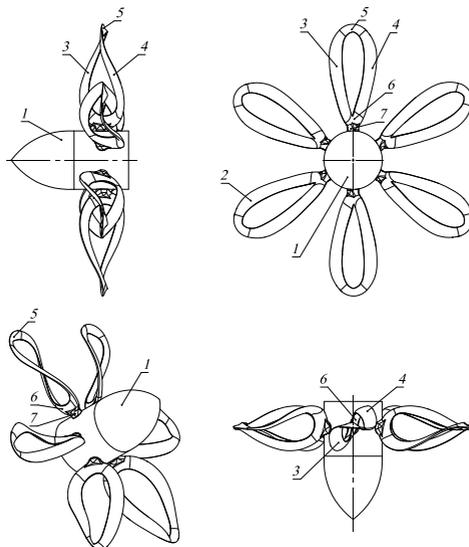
Tandem propeller with jointed blades by tip vortex generator
